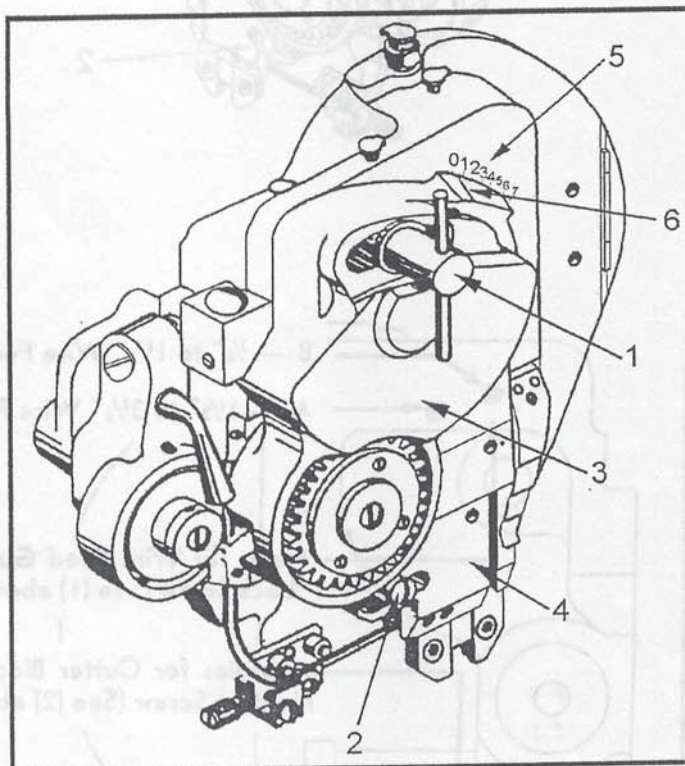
Wire Draw Adjustments and Wire Draw Scale
